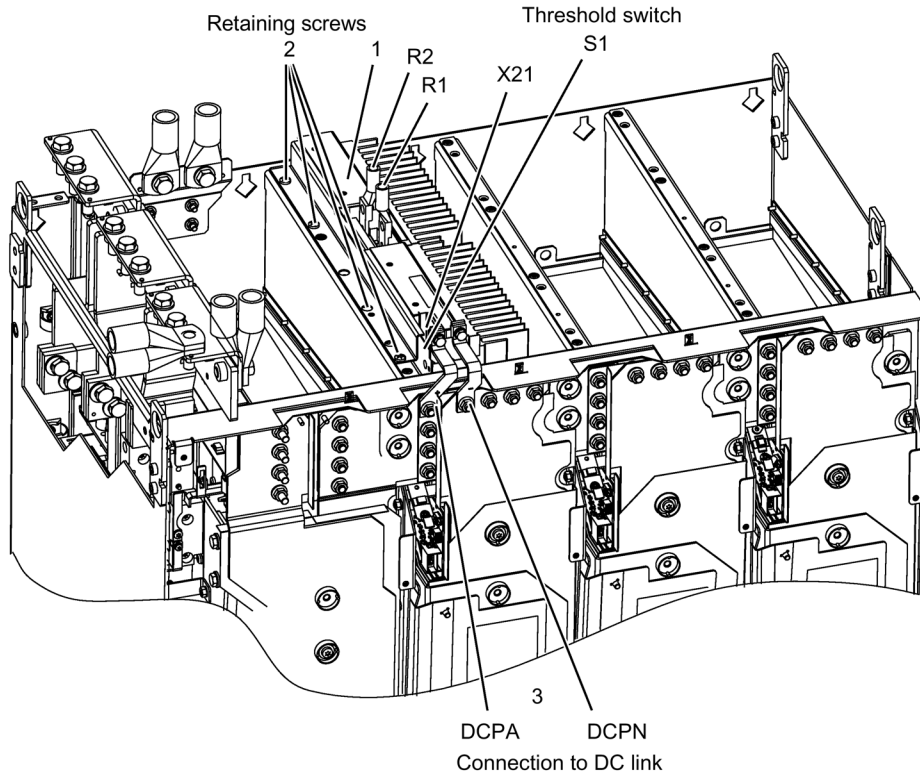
Installing the Braking Module in a Power Module frame size JX
